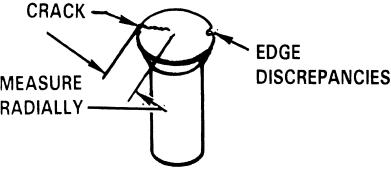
Solid Fastener Inspection (Sheet 2)
